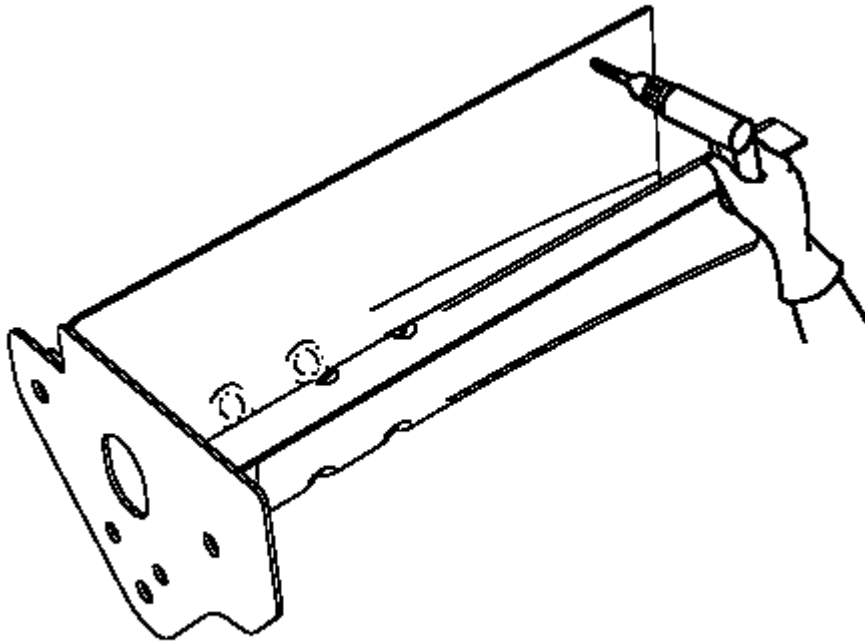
Drilling 8 mm (5/16 in) For Plug Welding Along Edges Of Rear Side Rail
